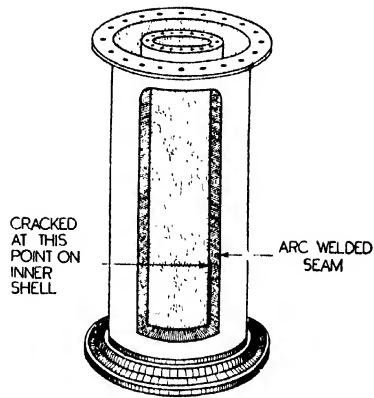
(right).—STEEL HEATING BOILER REPAIRED WITH BRONZE WELDING (*Suffolk Iron Foundry (1920), Ltd.*)
